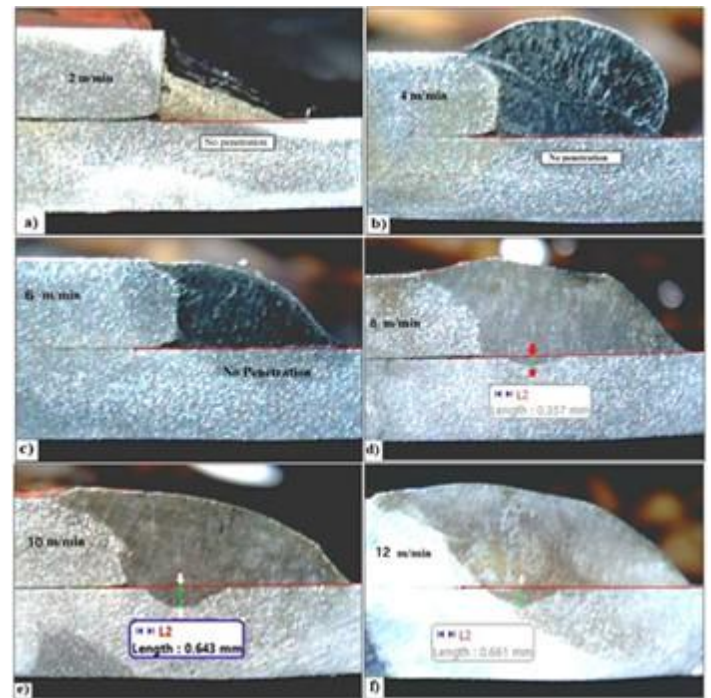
Cross-sectional macrostructures of GMAW weld beads deposited at different welding wire feed rates, a) 2 m/min, b) 4 m/min, c) 6 m/min, d) 8 m/min e) 10 m/min f) 12 m/min
